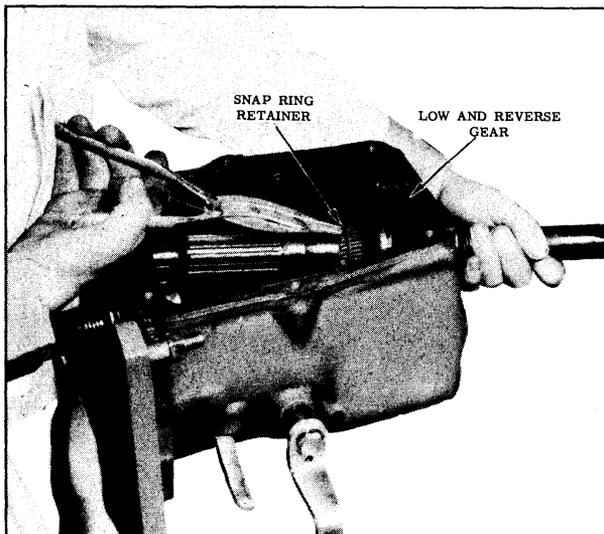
Removing Second Speed Gear Thrust Washer
